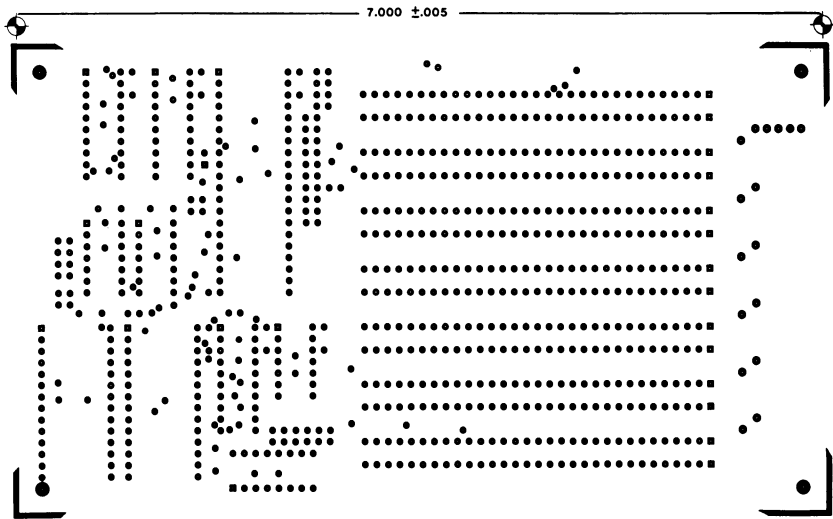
Pad master for the motherboard. It shows where the holes are to be drilled through the board.
